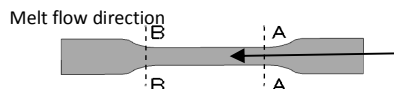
a schematic test specimen that was cut from the bottom of the part.
